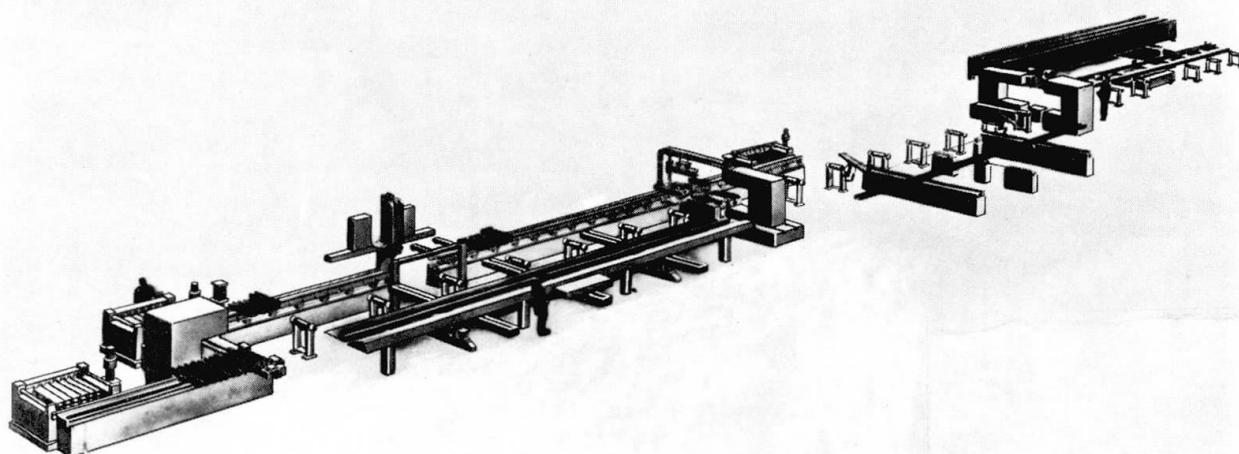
General view of monitor edge girder assemblage-and-welding flow line.
